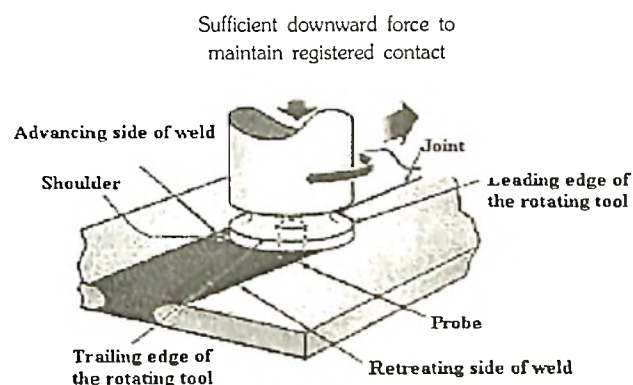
Friction Stir Welding (Ref. 1)
